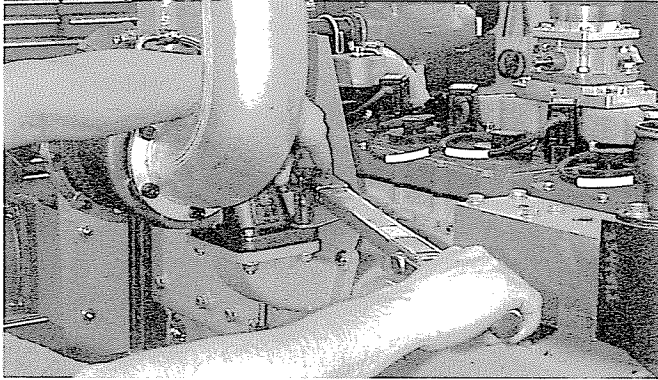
Turbocharger Mounting Nuts - Checking Torque
